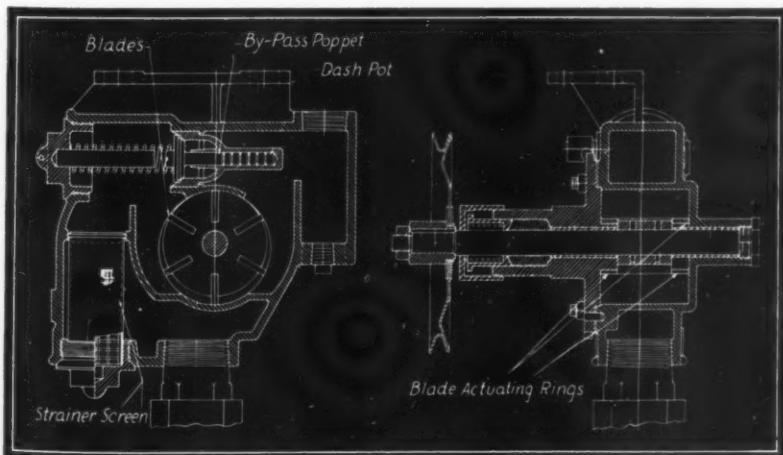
Composition blade material is designed to maintain absolutely accurate clearances in gasoline pump
